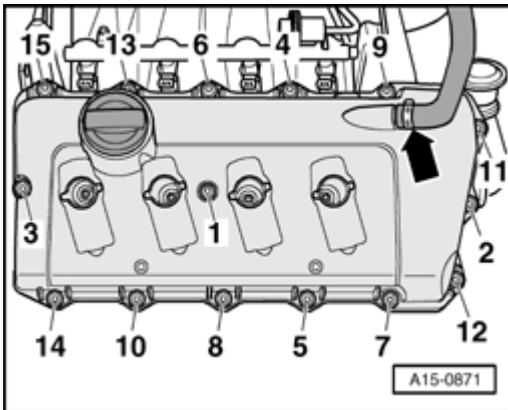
Disconnecting Hose Of Crankshaft Housing Ventilation & Removing Left Cylinder Head Cover Bolts In Sequence
